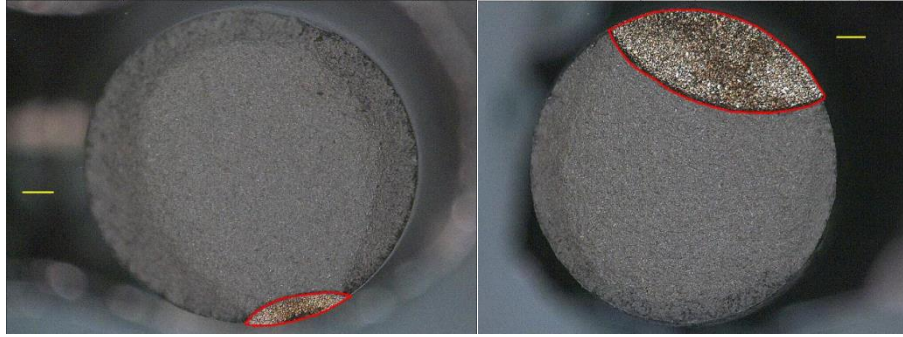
Penny-Shaped Cracks in Cylindrical Samples at 10% and 30% Depth
